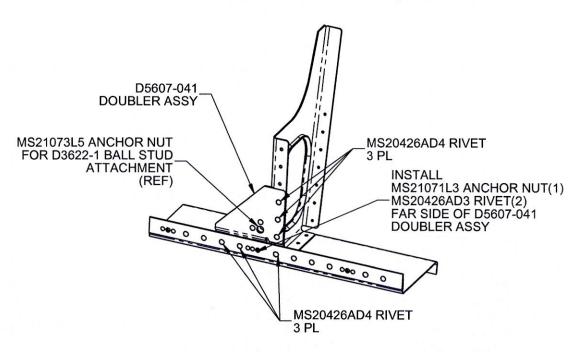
D5607-041 DOUBLER ASSY INSTALLATION LOOKING AT INNER SKIN DOOR
